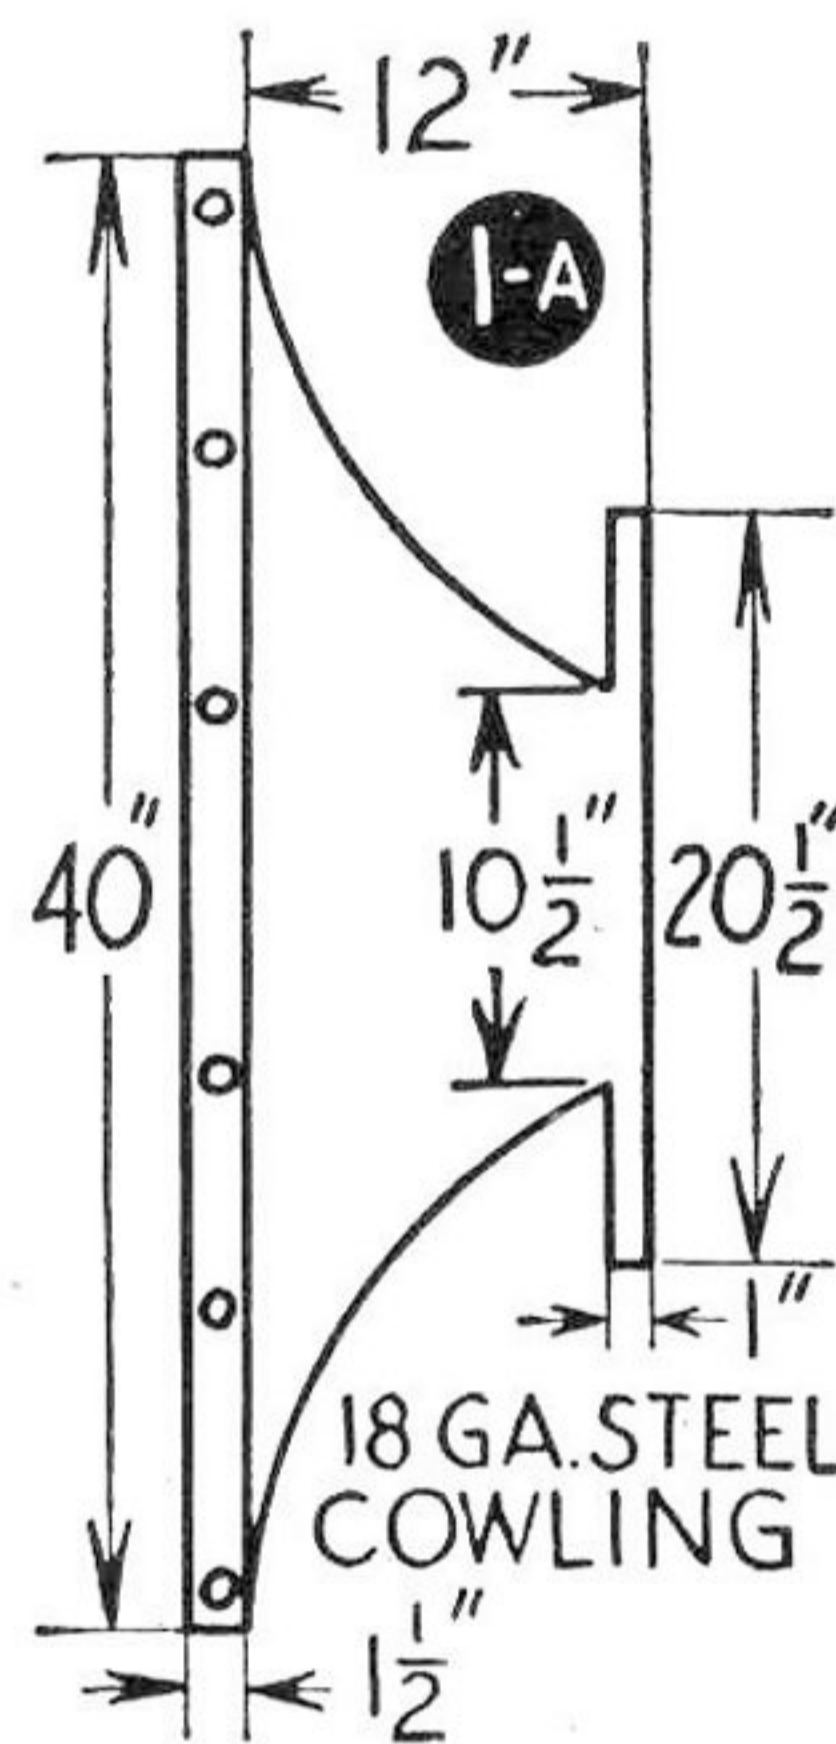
A. Pattern for sheet metal cowling to support gas tank.
